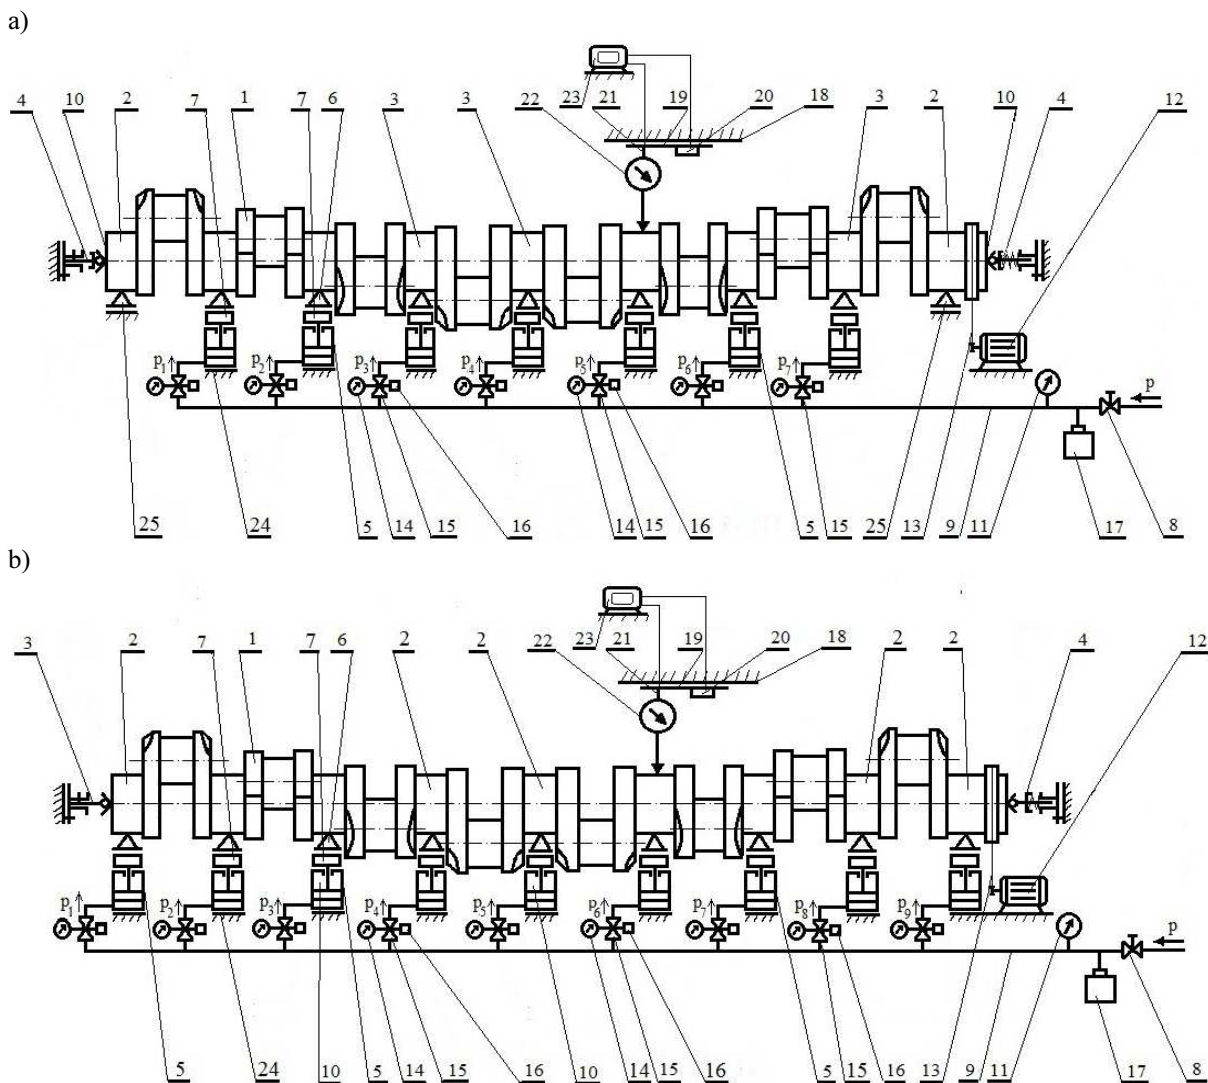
A diagram of the system utilizing the concept of elastic crankshaft support with a) the shaft set up in V-blocks, b) the shaft set into center points.
